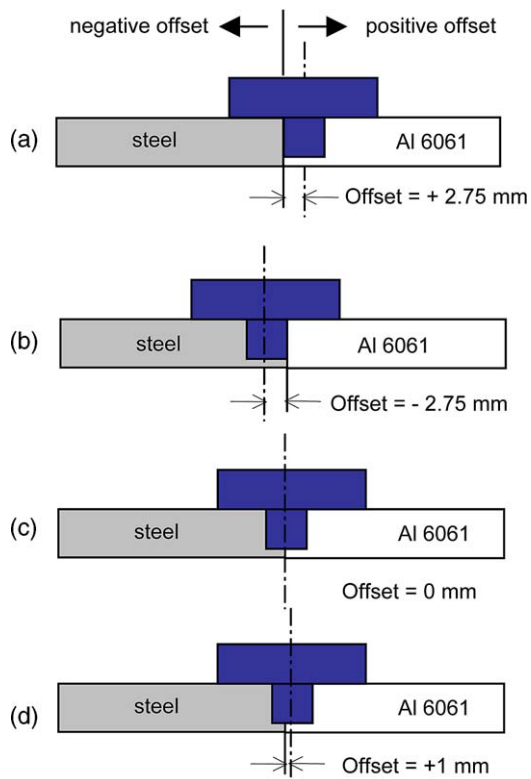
Scheme of relative location of probe and the butt line of the welded plates.
